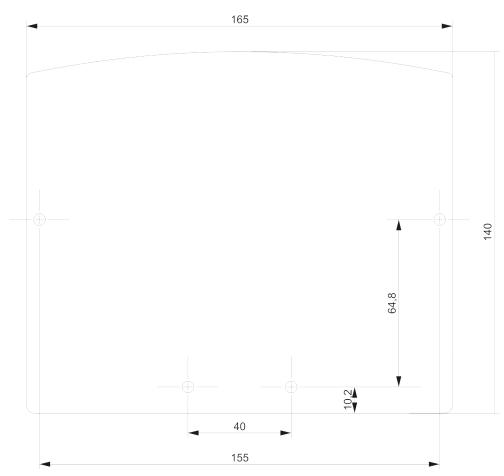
Drilling template for the Gateway box (specifications in mm)
